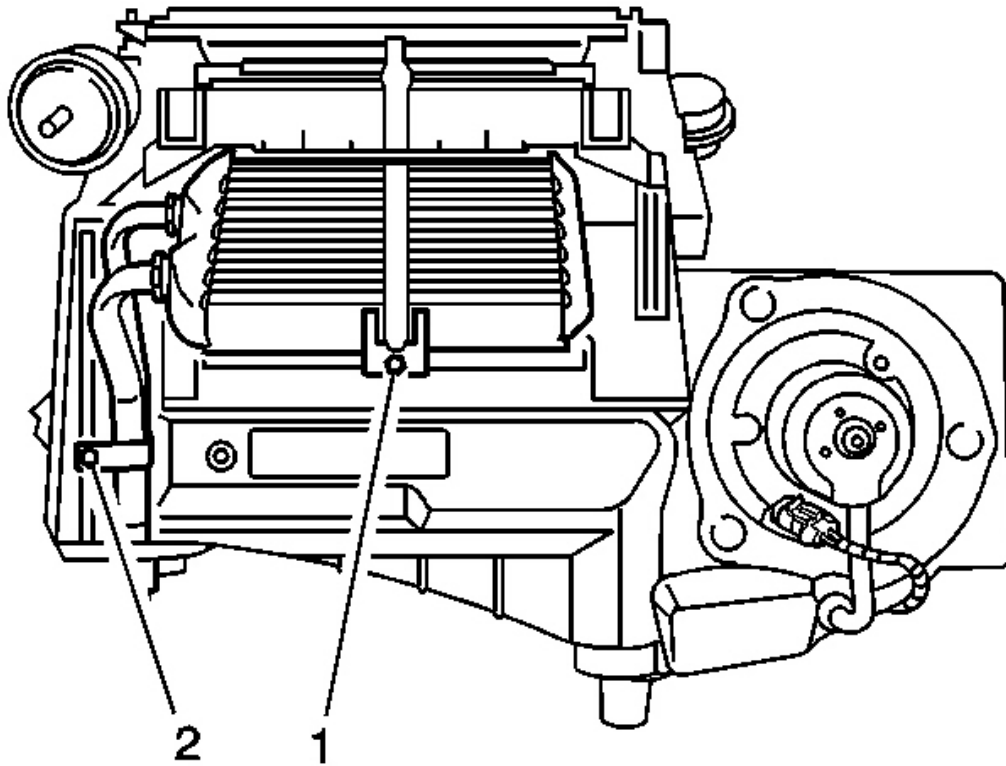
Heater Core Pipe Retainer Clamp & Screw
